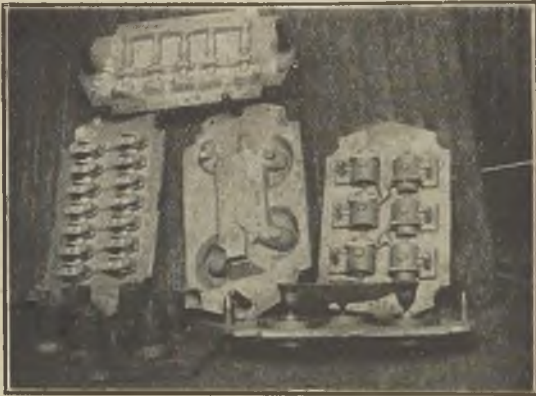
DOUBLE-SIDED PATTERN PLATES FOR MACHINE-MOULDING ENGINE DETAILS.
